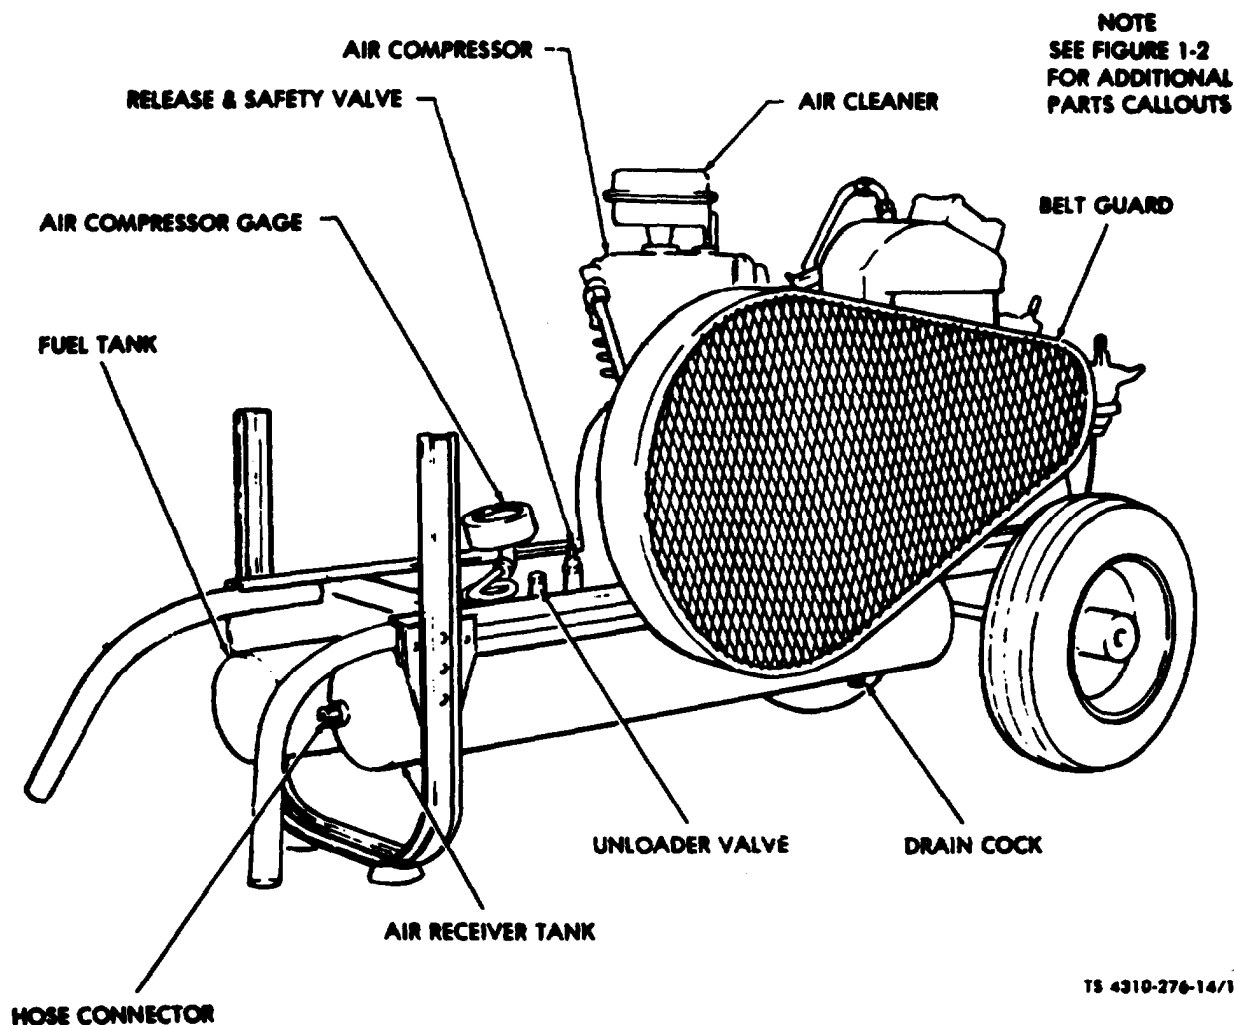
Air Compressor Assembly, Right Rear, Three-Quarter View.
